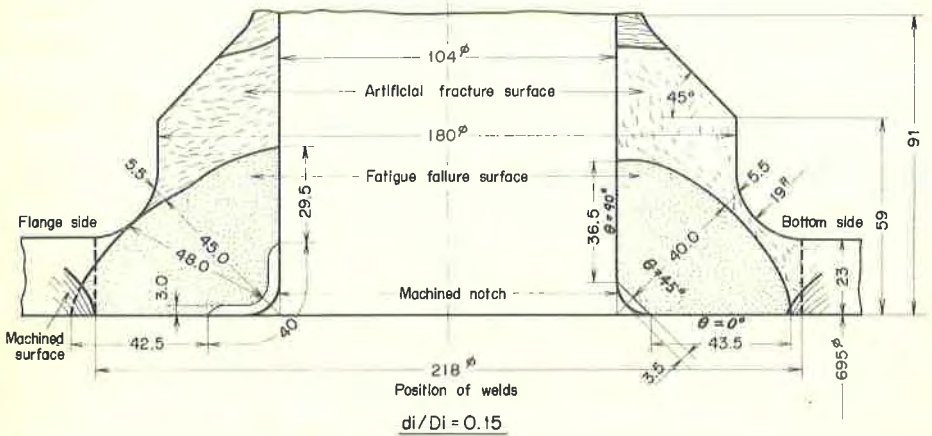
Drawing of cross section of No.4 nozzle after fatigue failure
